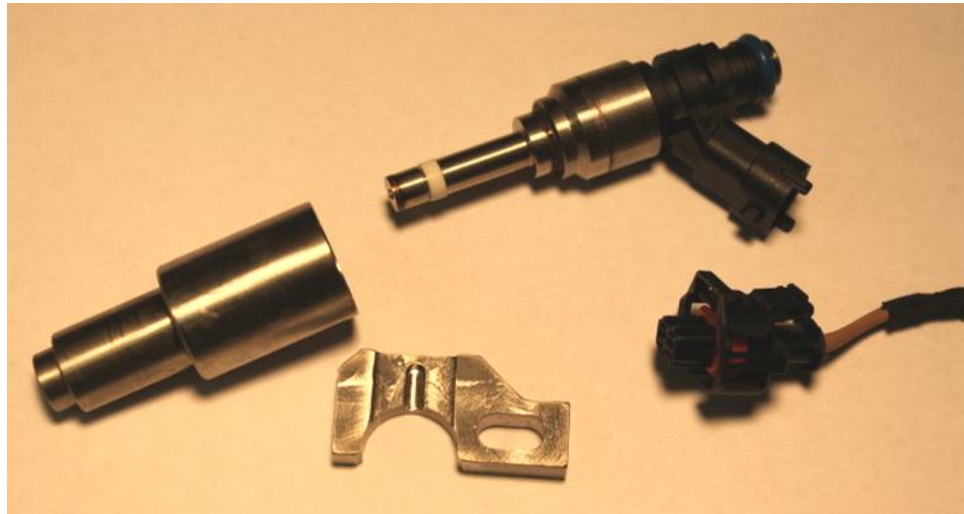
Bosch GDI fuel injector with sleeve, clamp and wiring couple
